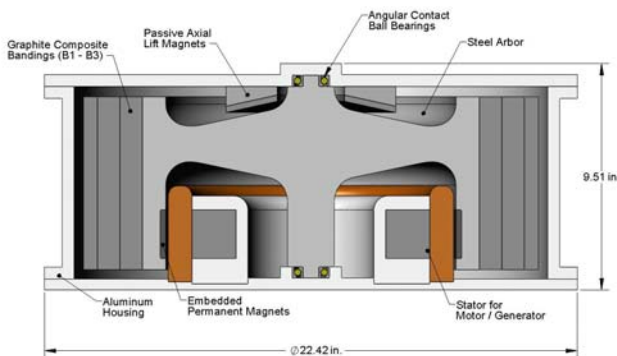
Cutaway view of flywheel motor and arbor used in simulations
